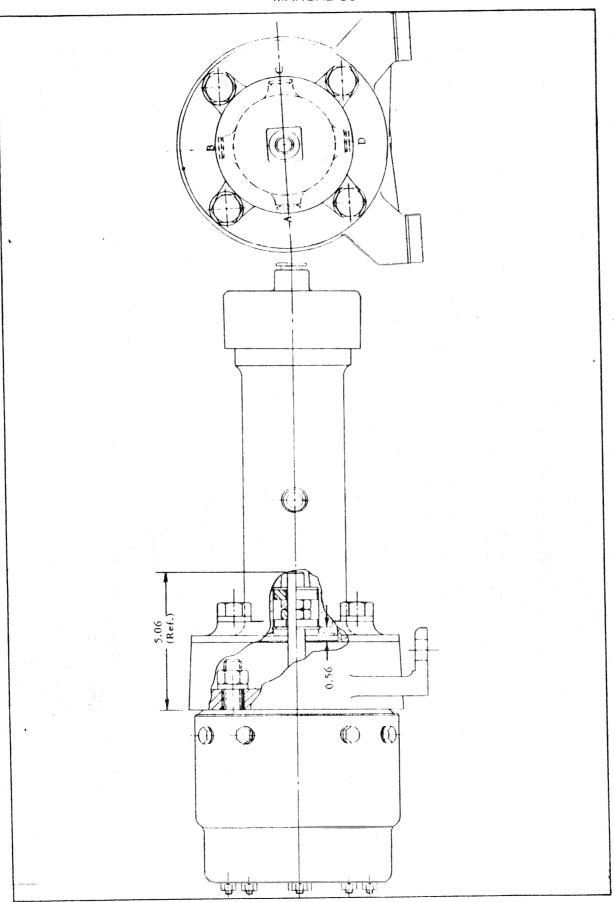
Actuator Assembly - Installation Positions of Inlet Port
